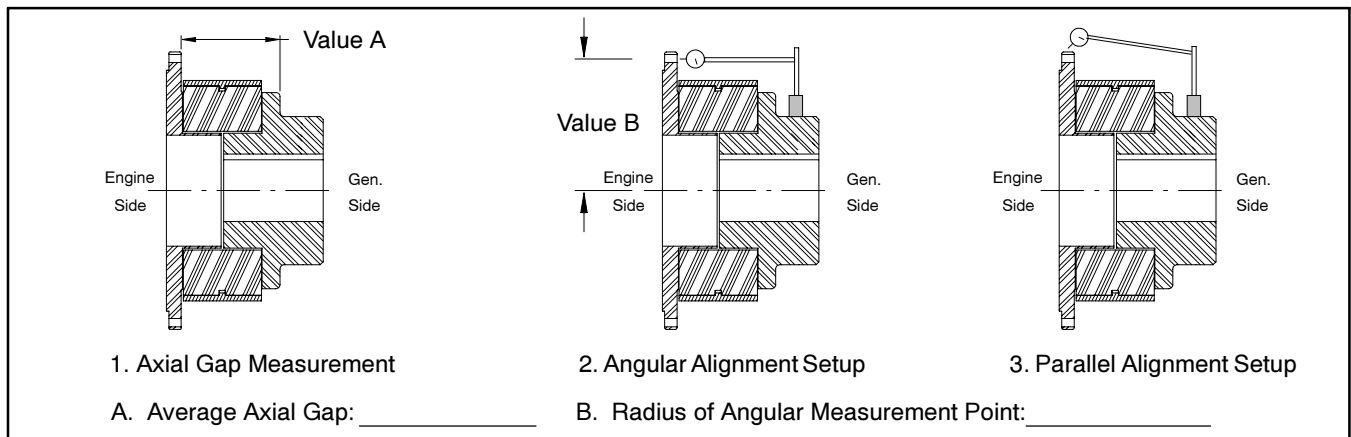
Dial Indicator Setup (HTB Coupling)
